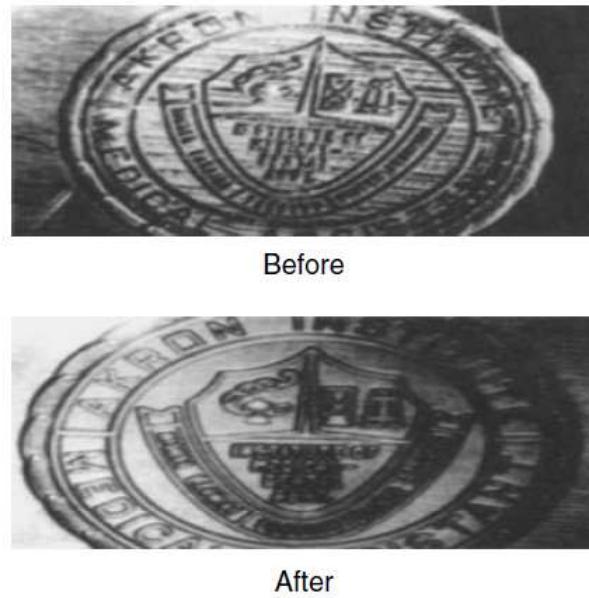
Ultrasonic polishing of CNC machined parts
